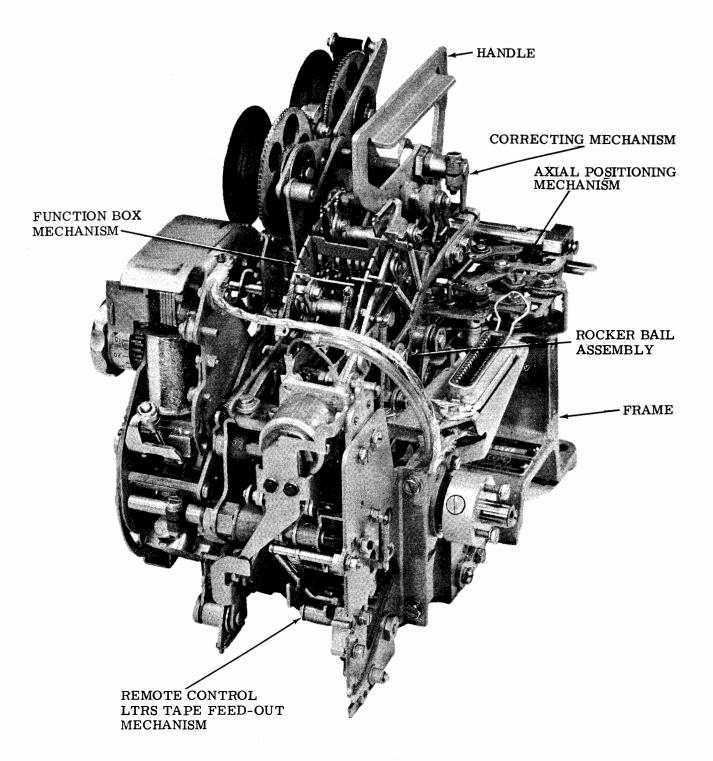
28 Typing Reperforator Unit With Remote Control LTRS
